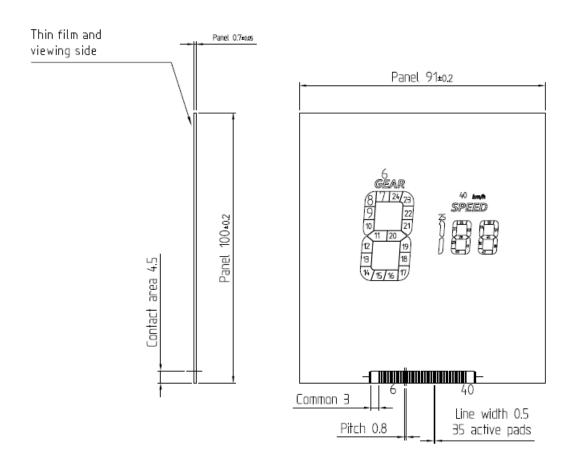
Schematic of cut-to-measure ELT35S non-encapsulated display, without flexible printed circuit (FPC). The FPC is bonded to the active pads on the lower edge of the display assembly. Also segment mapping shown, see below for details.
